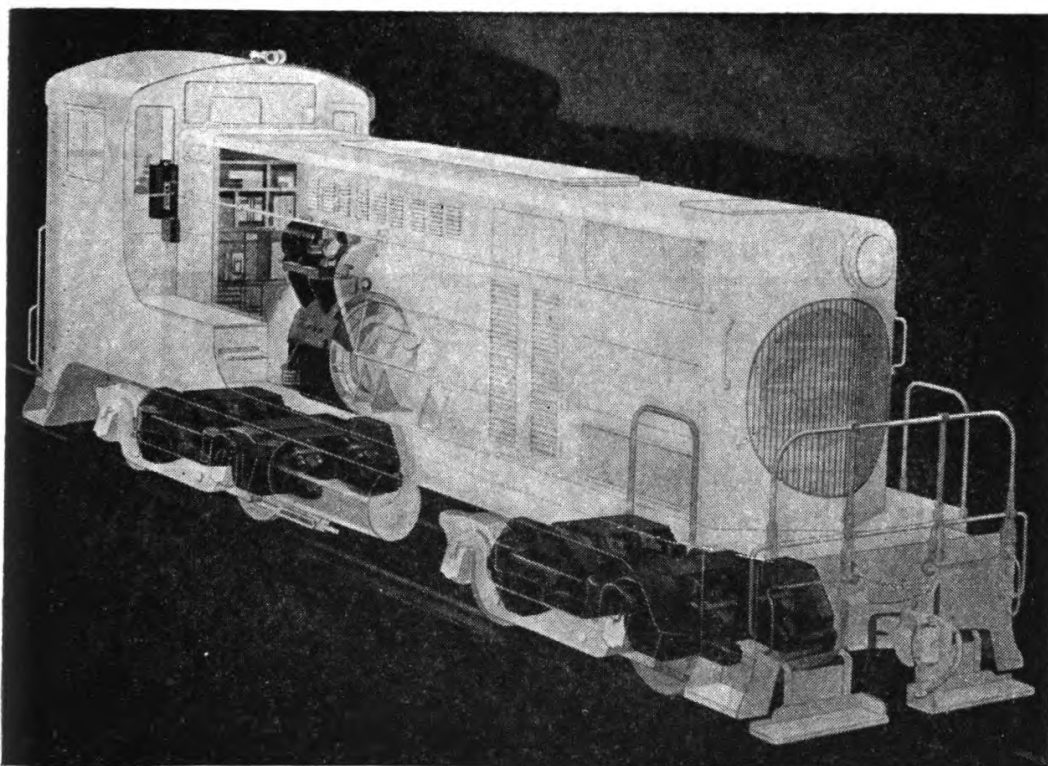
Phantom View of Locomotive Showing Electrical Equipment in Black
